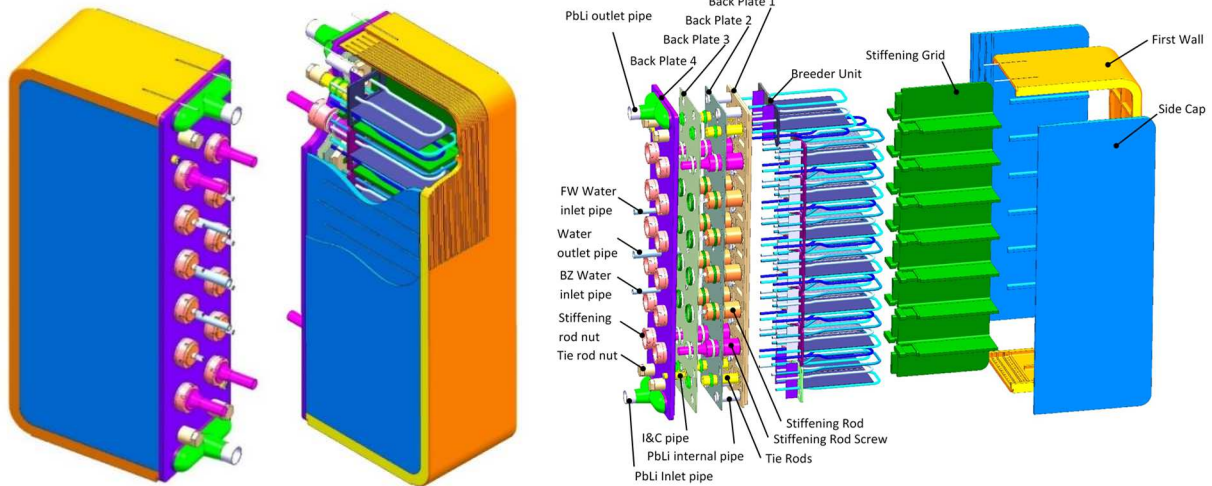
WCLL TBM global views, internal structures and exploded view of the WCLL TBM
